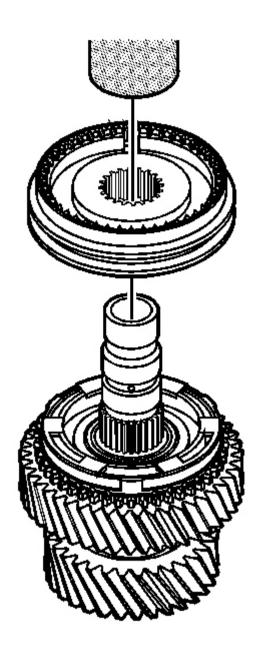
1st/2nd Synchronizer & J 24433 Courtesy of GENERAL MOTORS CORP.
